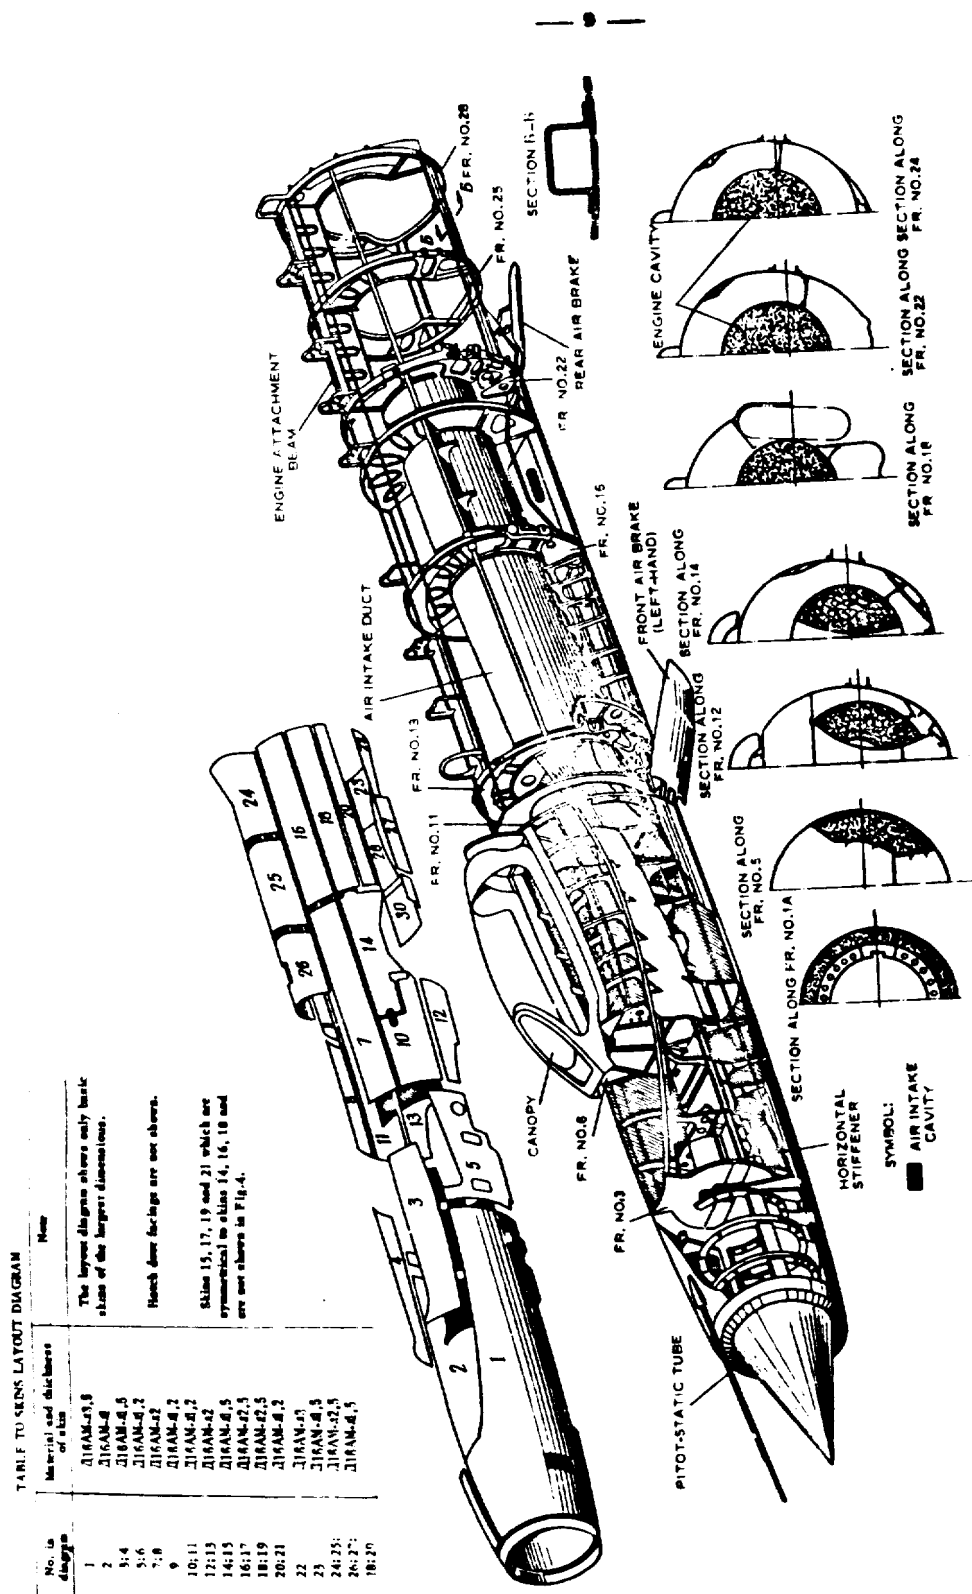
FUSELAGE NOSE SECTION STRUCTURE AND ARRANGEMENT (See the Skins Layout Table)
